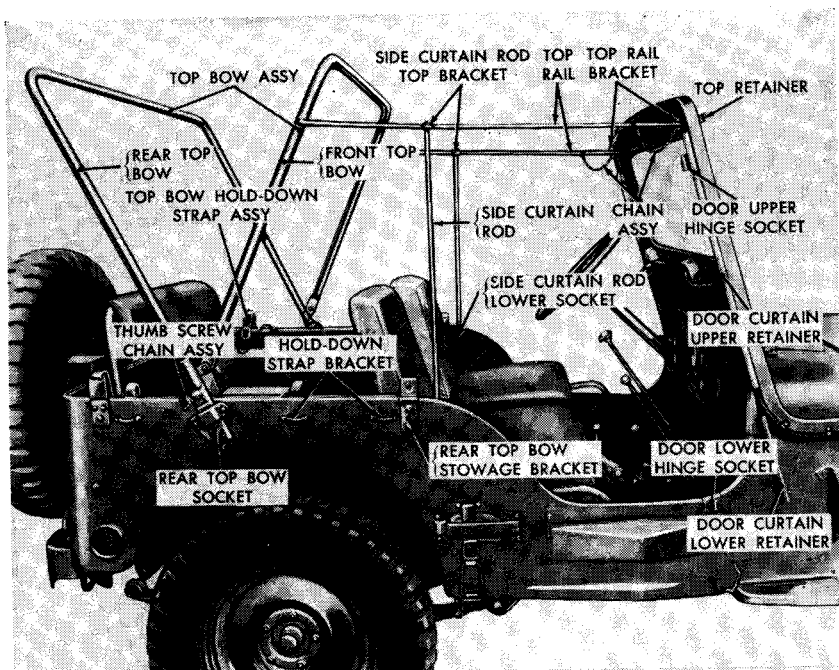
Top cover and rear curtain assembly, side curtains, door curtains, and top bow assembly.
